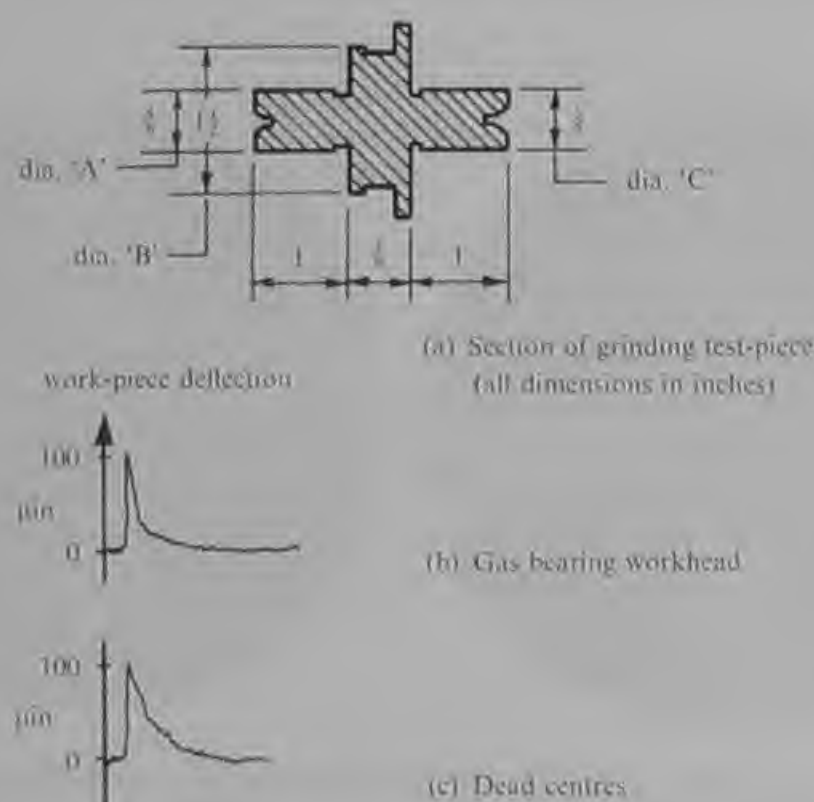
Deflection of workpiece during grinding (after Trayner, Ref. 15)
